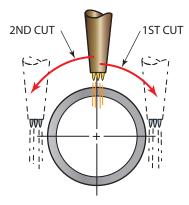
Small-diameter pipe can be cut without changing the angle of the torch. After the top is cut, roll the pipe to cut the bottom.
